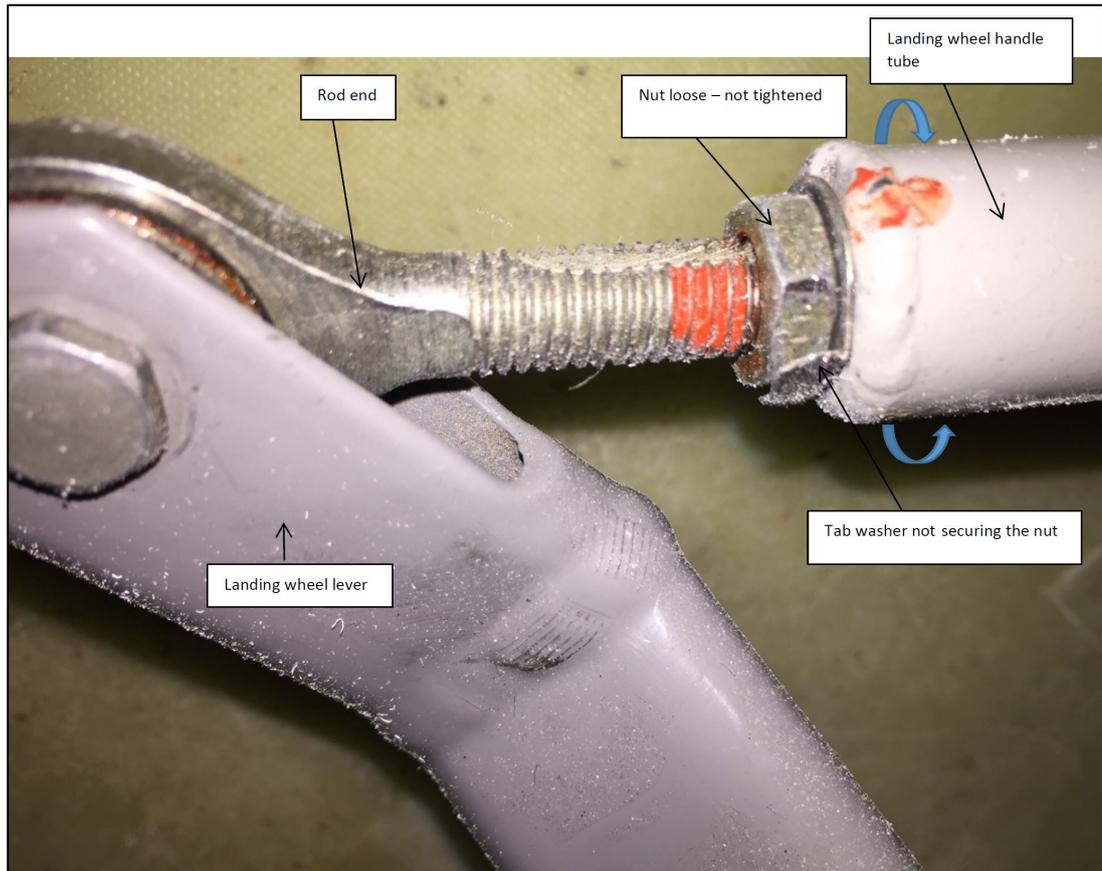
Landing wheel handle tube rod end connection to landing wheel lever with the loose nut.
